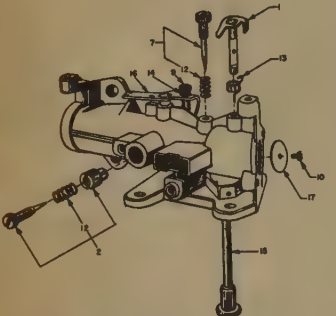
Exploded view of Clinton suction lift carburetor. On late production models, idle adjustment screw is threaded directly into carburetor body and does not have the threaded bushing shown. Choke disc (17) and throttle disc (not shown) may be attached with one screw as shown although later models have two holes for attaching screws in each disc and shaft.
